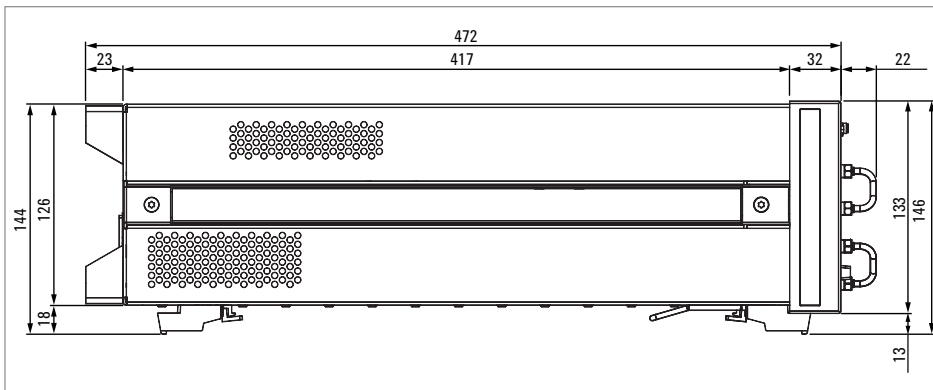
Dimensions (side view, with Option E5092A-020, in millimeters, nominal)
